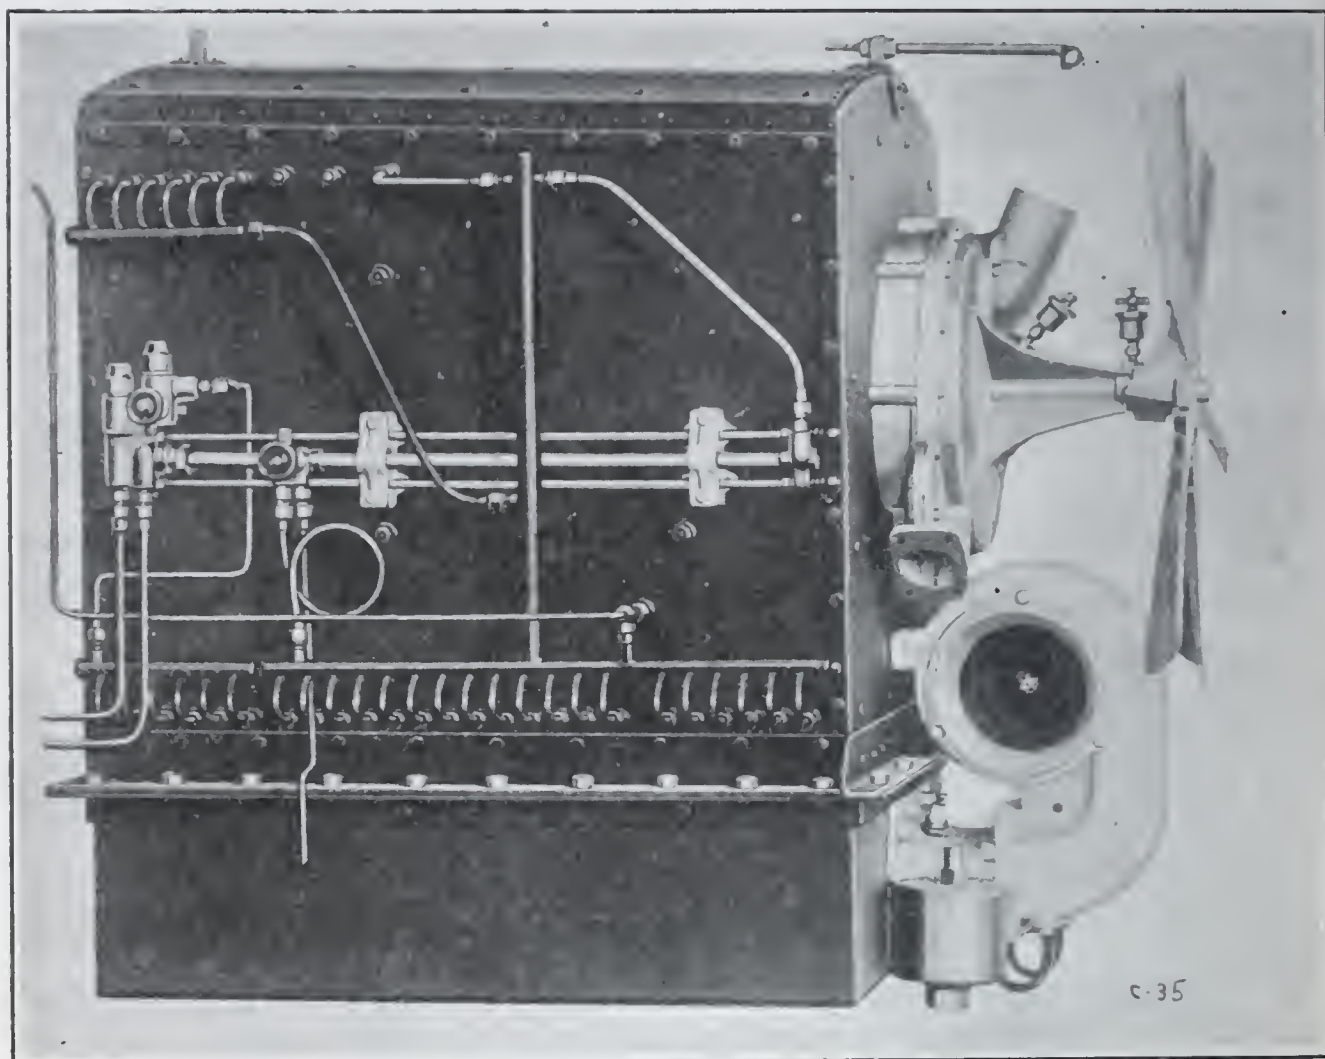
Side View of Doble-Detroit Boiler, Showing Water Regulator, Fan Driven by Exhaust Steam-Turbine, and Fuel Blower Driven by Electric Motor.
